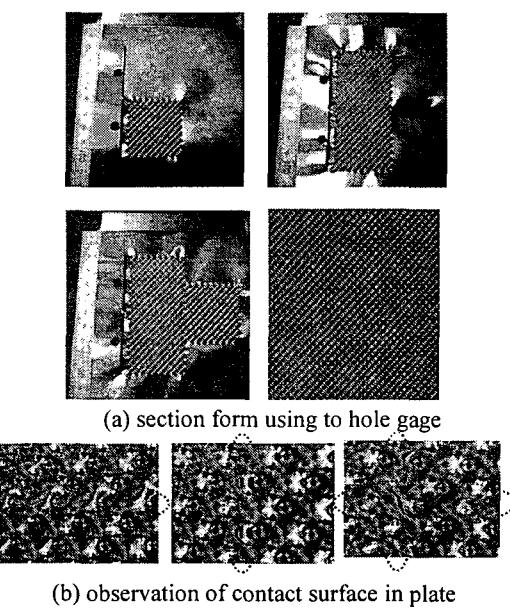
Forming process of inner structured plate with micro dimpled using to hole gage
